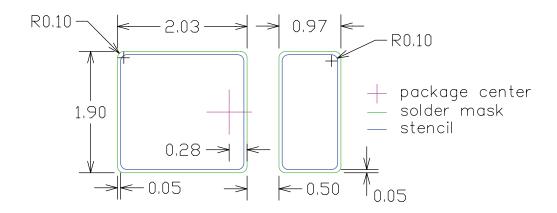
Recommended PCB solder pad layout for LUXEON 2835 Color Line.
